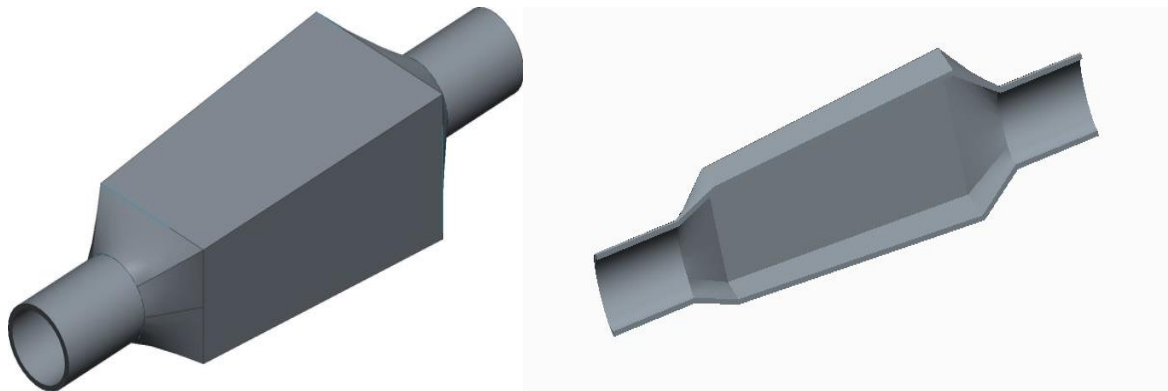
Three Dimensional View and Cross Sectional View of Rectangular Heat Exchanger.
